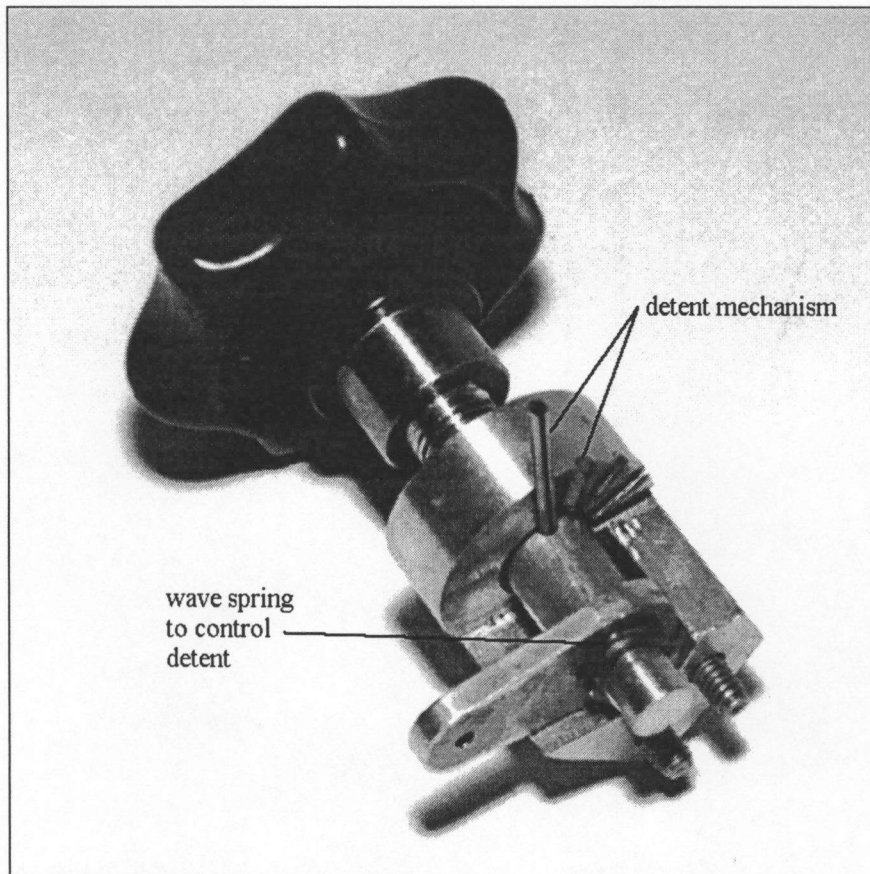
The knob-handled valve controller, used on both the bike and the ski
